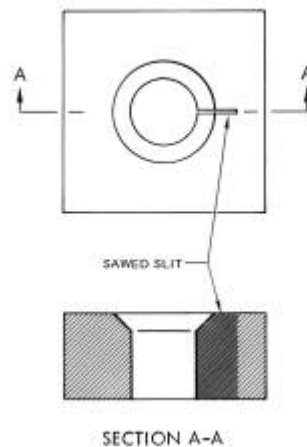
Reference Standard for Inspection for Cracks in Skin.
